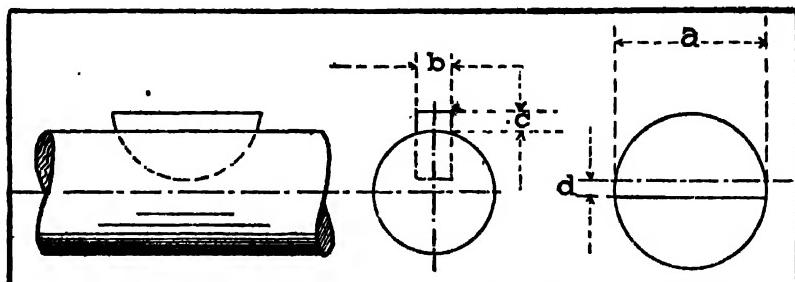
Diagram Showing Principal Dimensions of Woodruff Keys to Accompany Table of Sizes.
